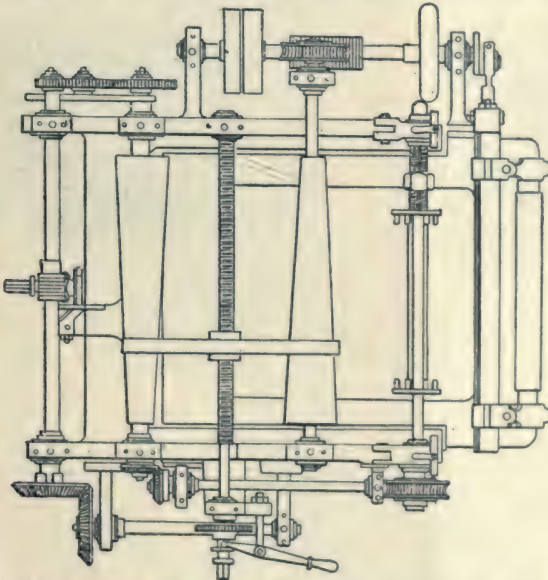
Machine for cutting a continuous sheet of rubber.
